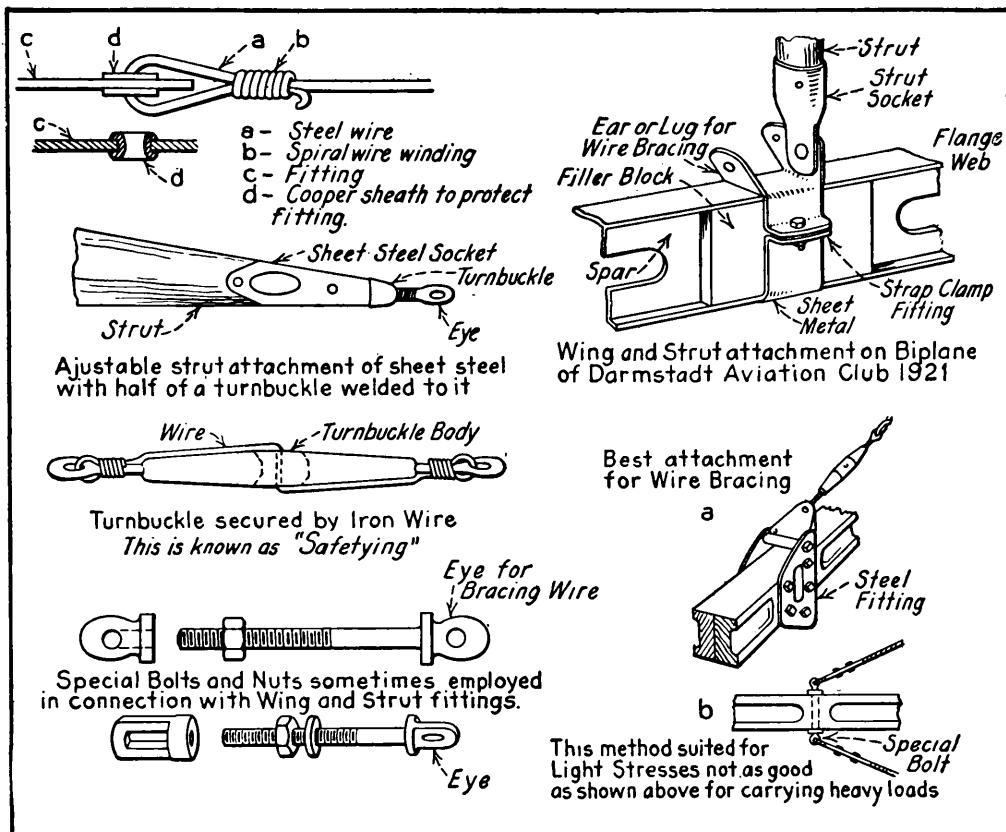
Details Showing Method of Attaching Bracing Wires and Struts and Typical Metal Fittings.
